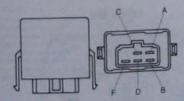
Checking the control unit (Sec 14) Terminal Voltage
